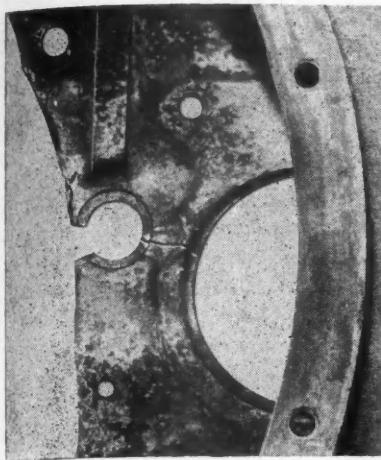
, above, shows the crack in the narrow bridge of metal between the starter unit opening and the larger inside opening of the bell housing illustrated at Fig. 3. The cracked area was melted away about one-third before welding. Fig. 5, upper right, shows housing after repair. A small amount of reinforcement was made at the outer edges of the bolt holes. Illustration at right shows reverse side of the job
